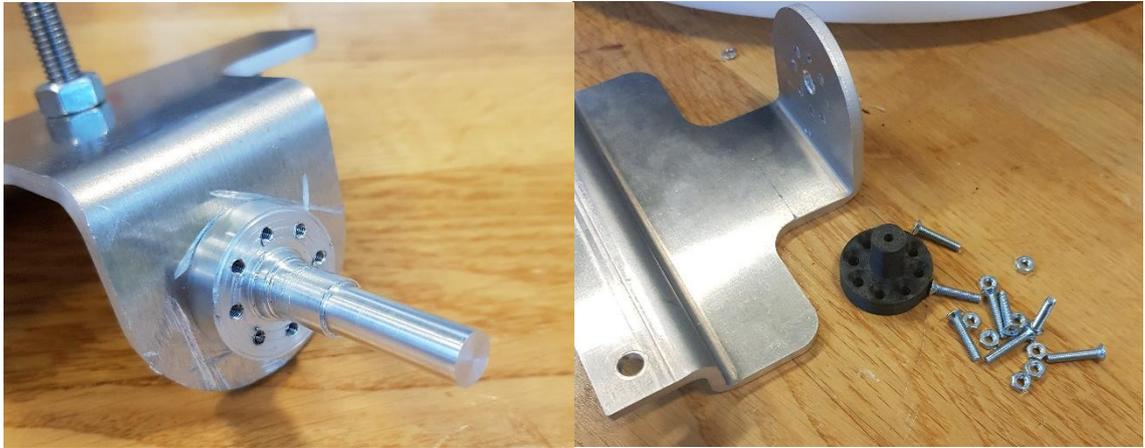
On the left, the driven shaft fixed to one plaque. On the right, the other plaque, dragged shaft and union elements.
